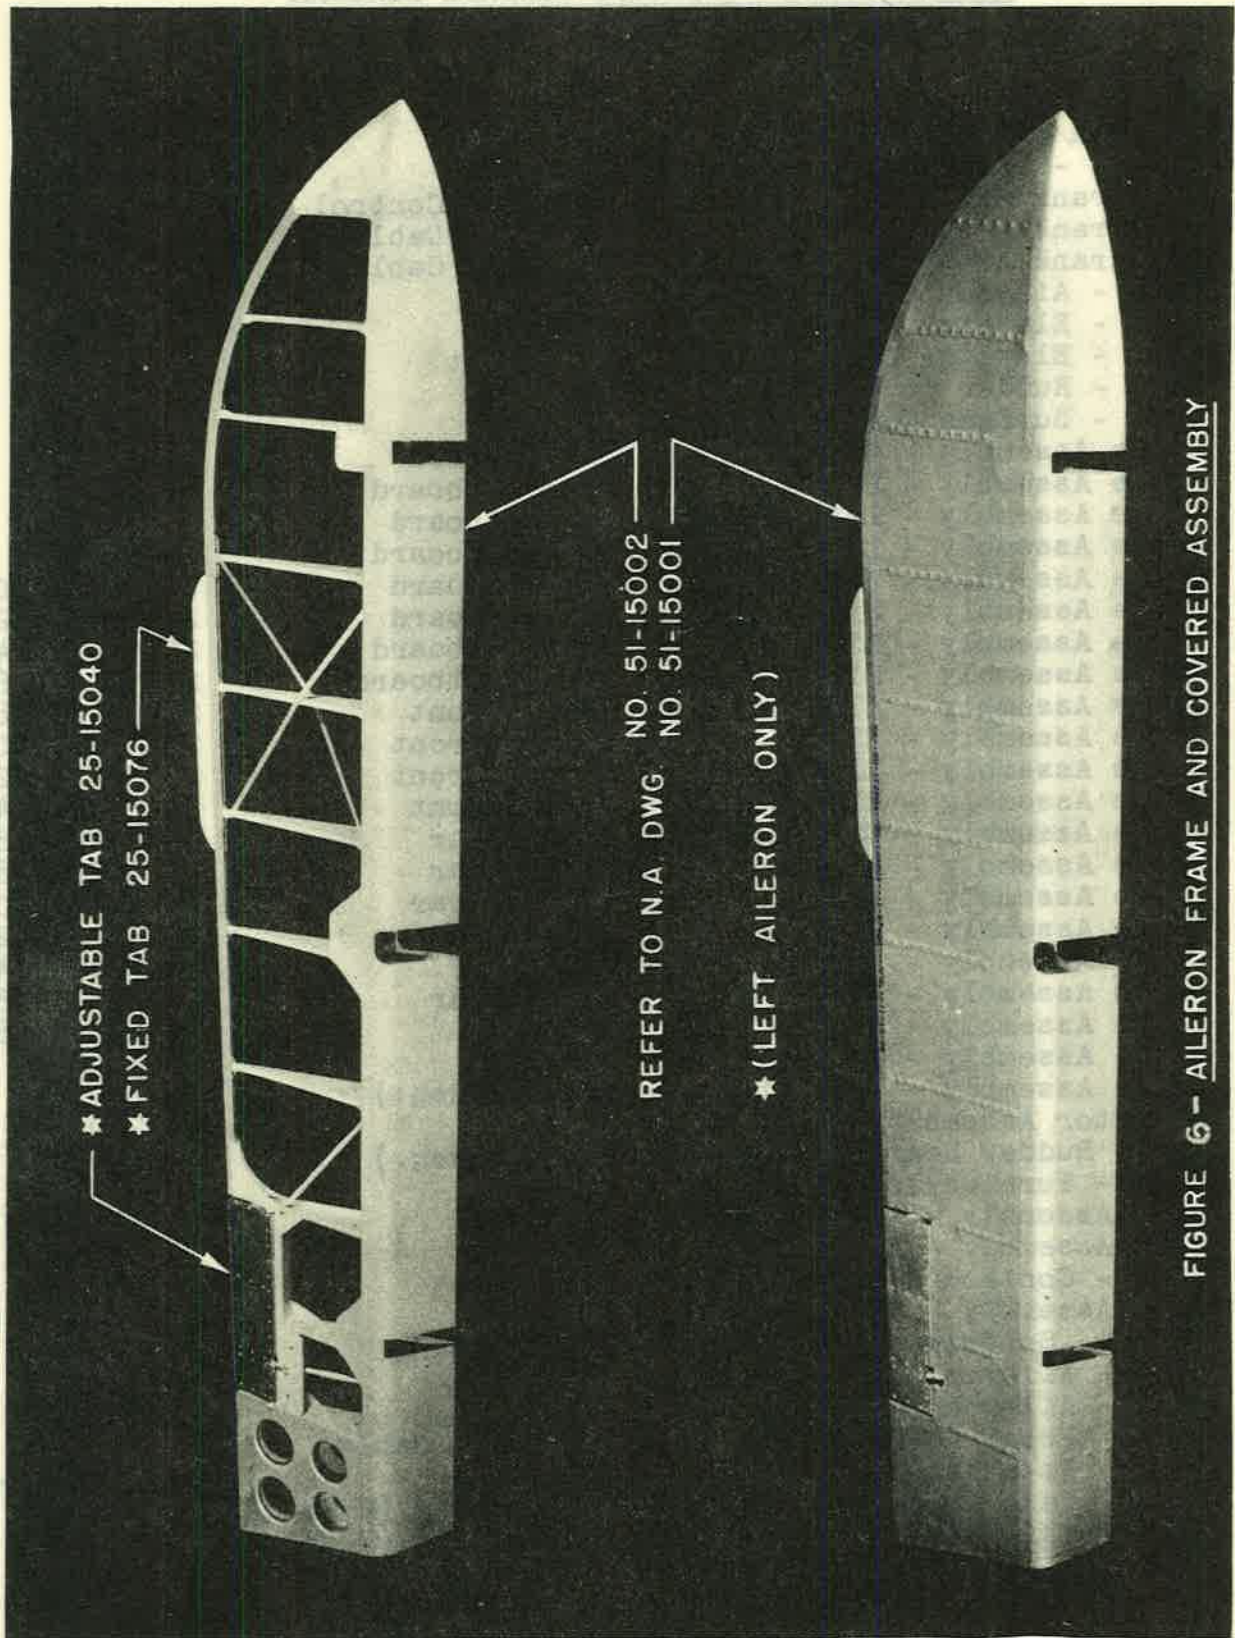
AILERON FRAME AND COVERED ASSEMBLY
